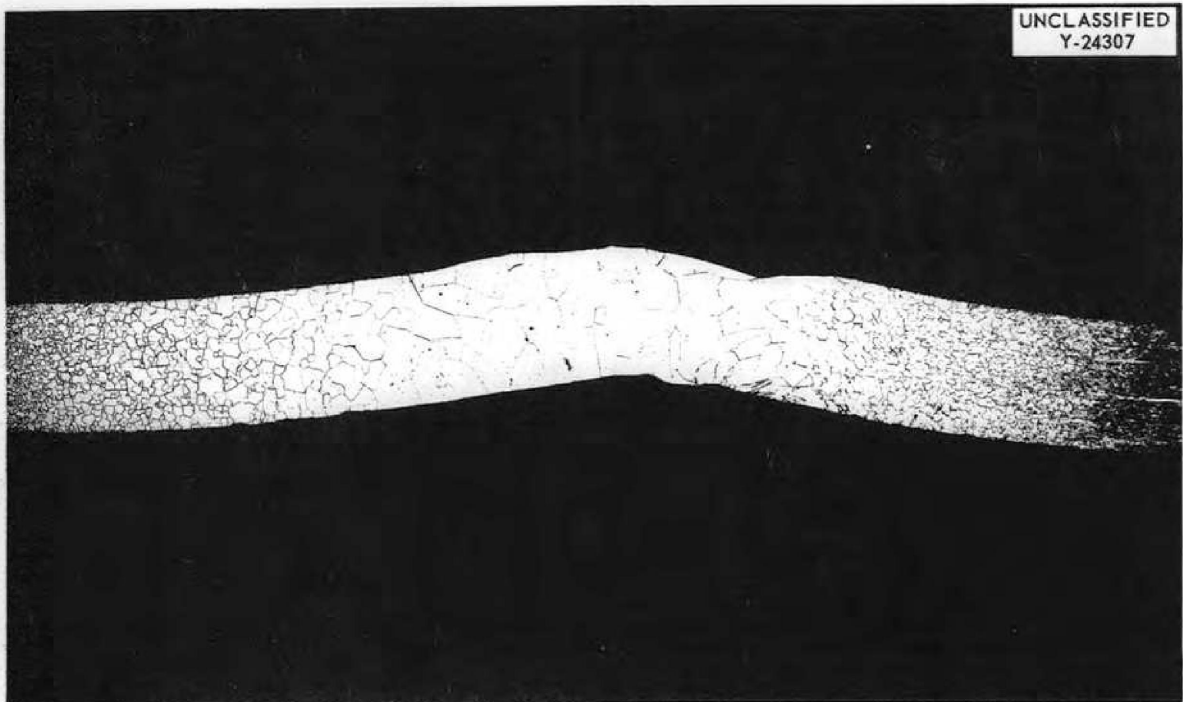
Fusion Seam Weld Manually Made in Niobium Tubing at Fansteel Metallurgical Corporation. 22X.
